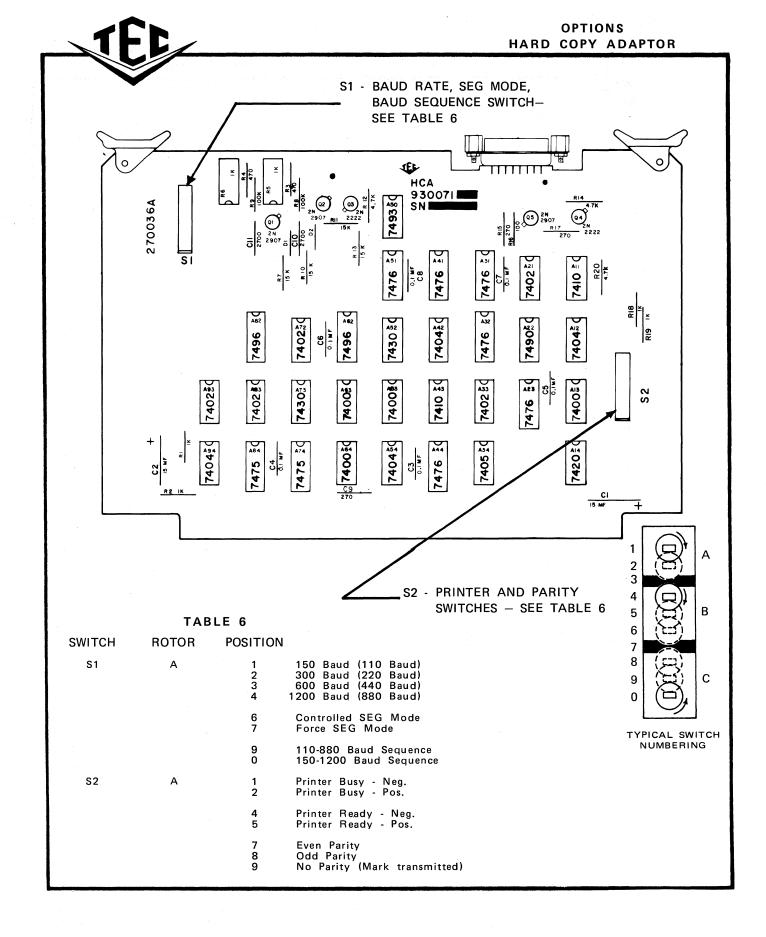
SWITCH OPTIONS, HARD COPY ADAPTOR PCB
